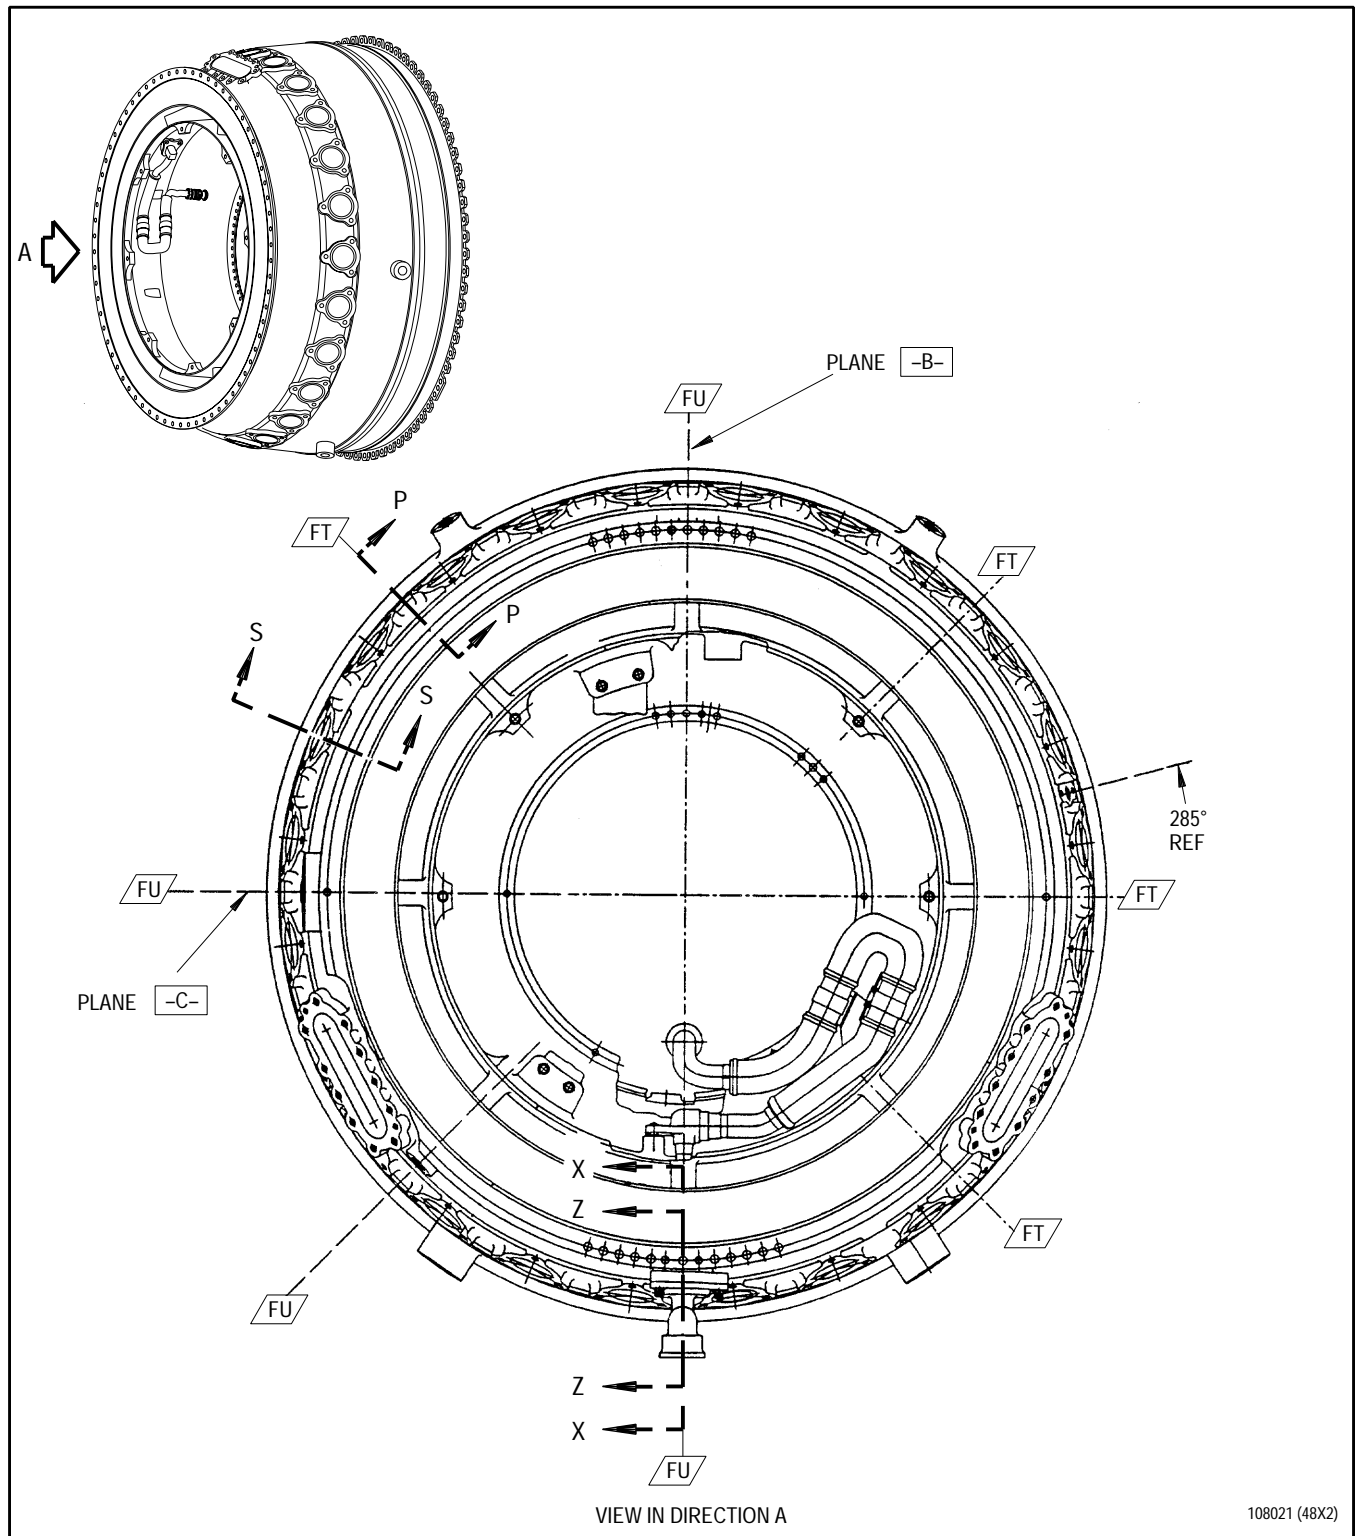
Diffuser Case Assembly - Shotpeen Requirements (Sheet 1 of 6)
